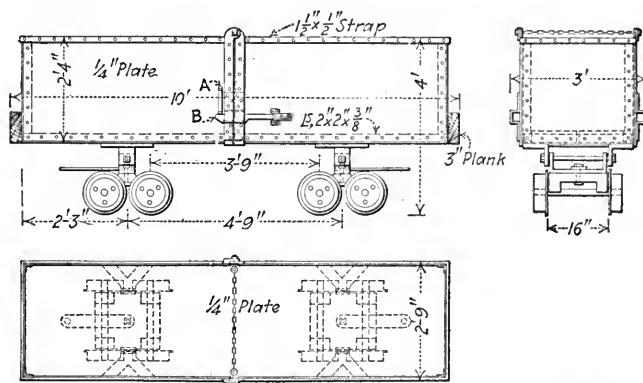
SMUGGLER-UNION CAR THAT BREAKS IN THE MIDDLE.
